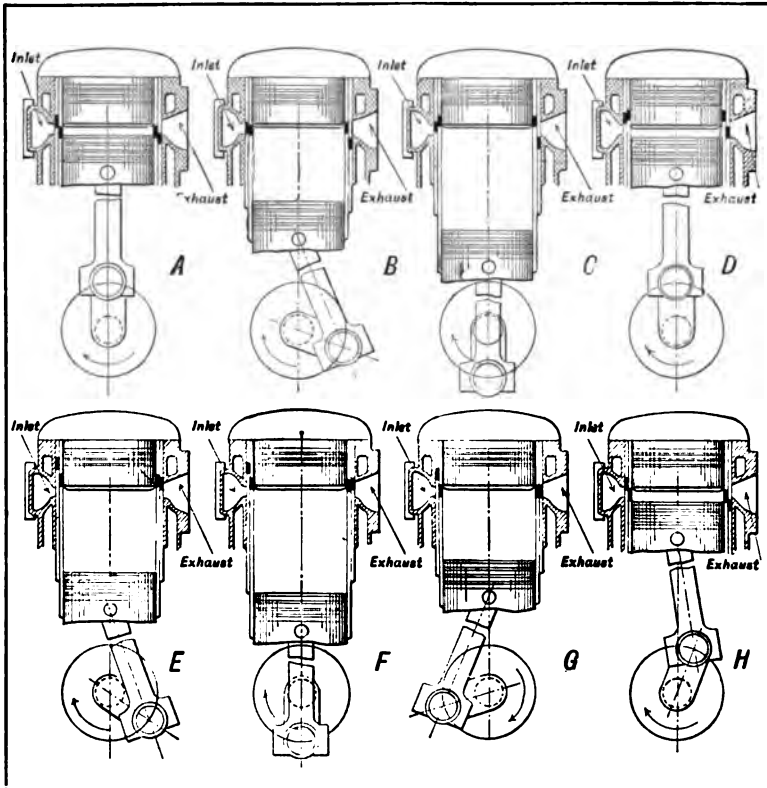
Diagram showing relative movement of sleeves and camshaft of Knight type motor.
